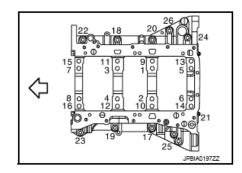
Lower Cylinder Block Mounting Bolts (1 To 16) Tightening Sequence Courtesy of NISSAN NORTH AMERICA, INC.
